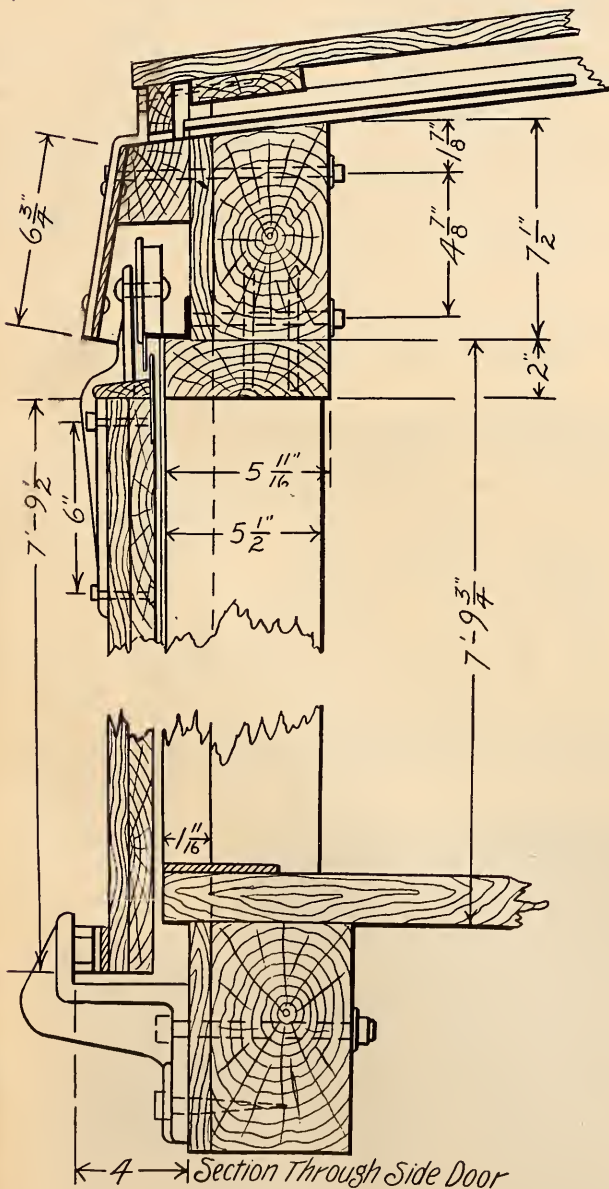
80,000 LBS. CAPACITY STEEL UNDERFRAME BOX CARS—ILLINOIS CENTRAL RAILROAD.
